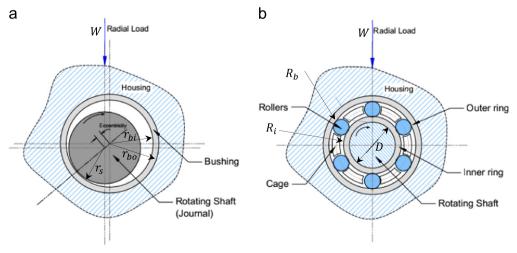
Schematic of (a) journal bearings (b) rolling element bearings under a radial load.
